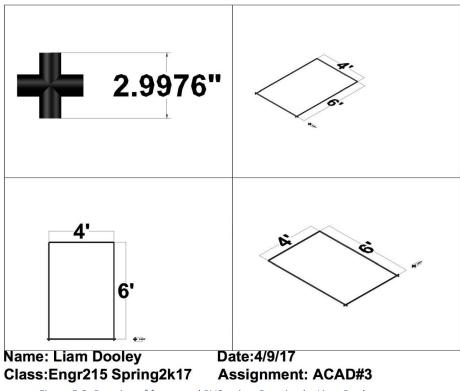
Drawing of frame and PVC union. Drawing by Liam Dooley
